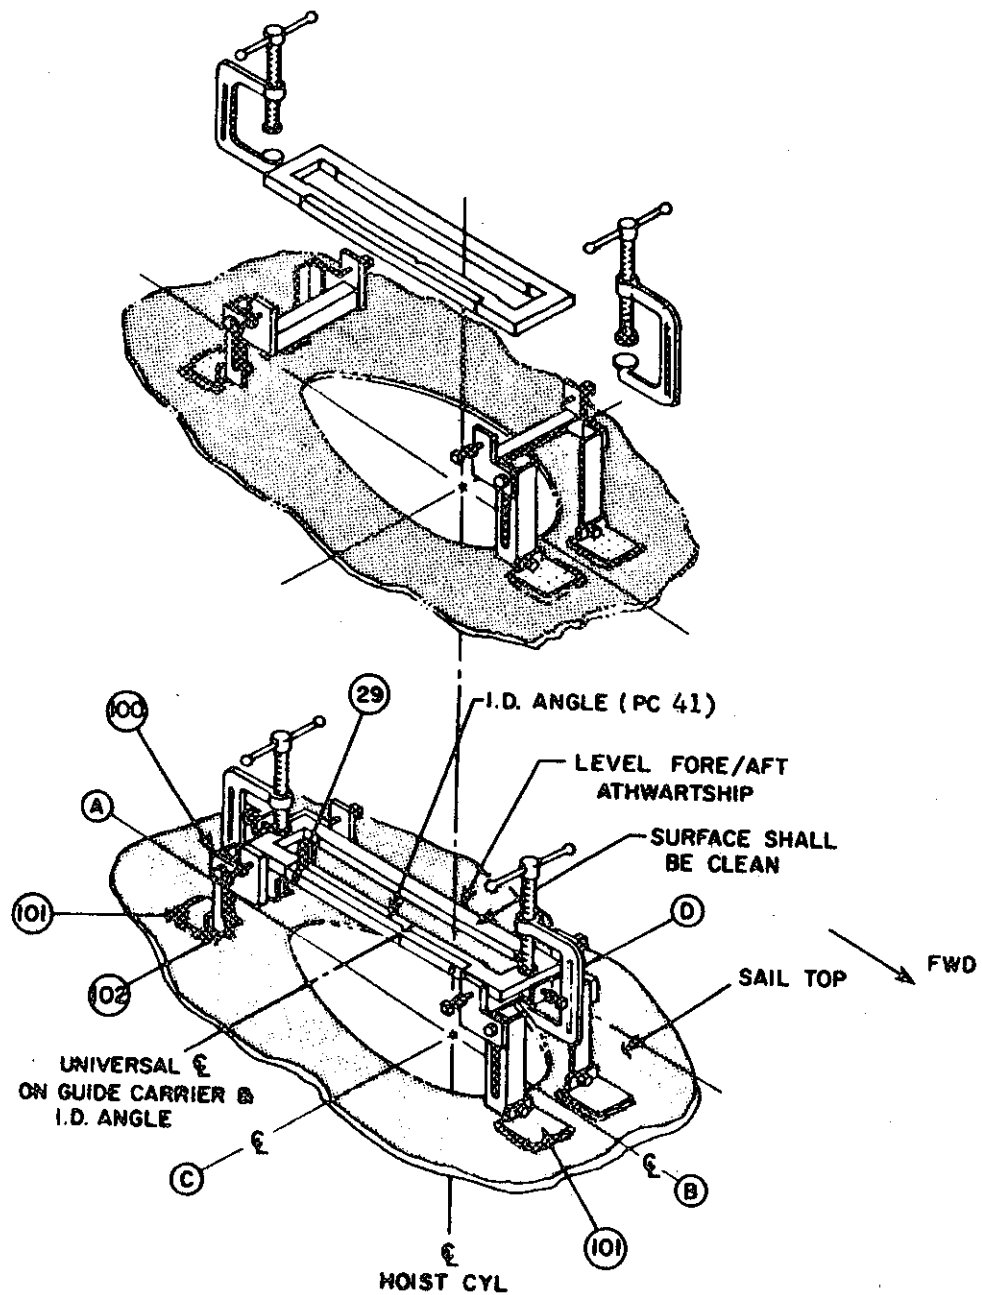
Installing Alignment Fixture Support Assembly and Foundation onto Sail Top
